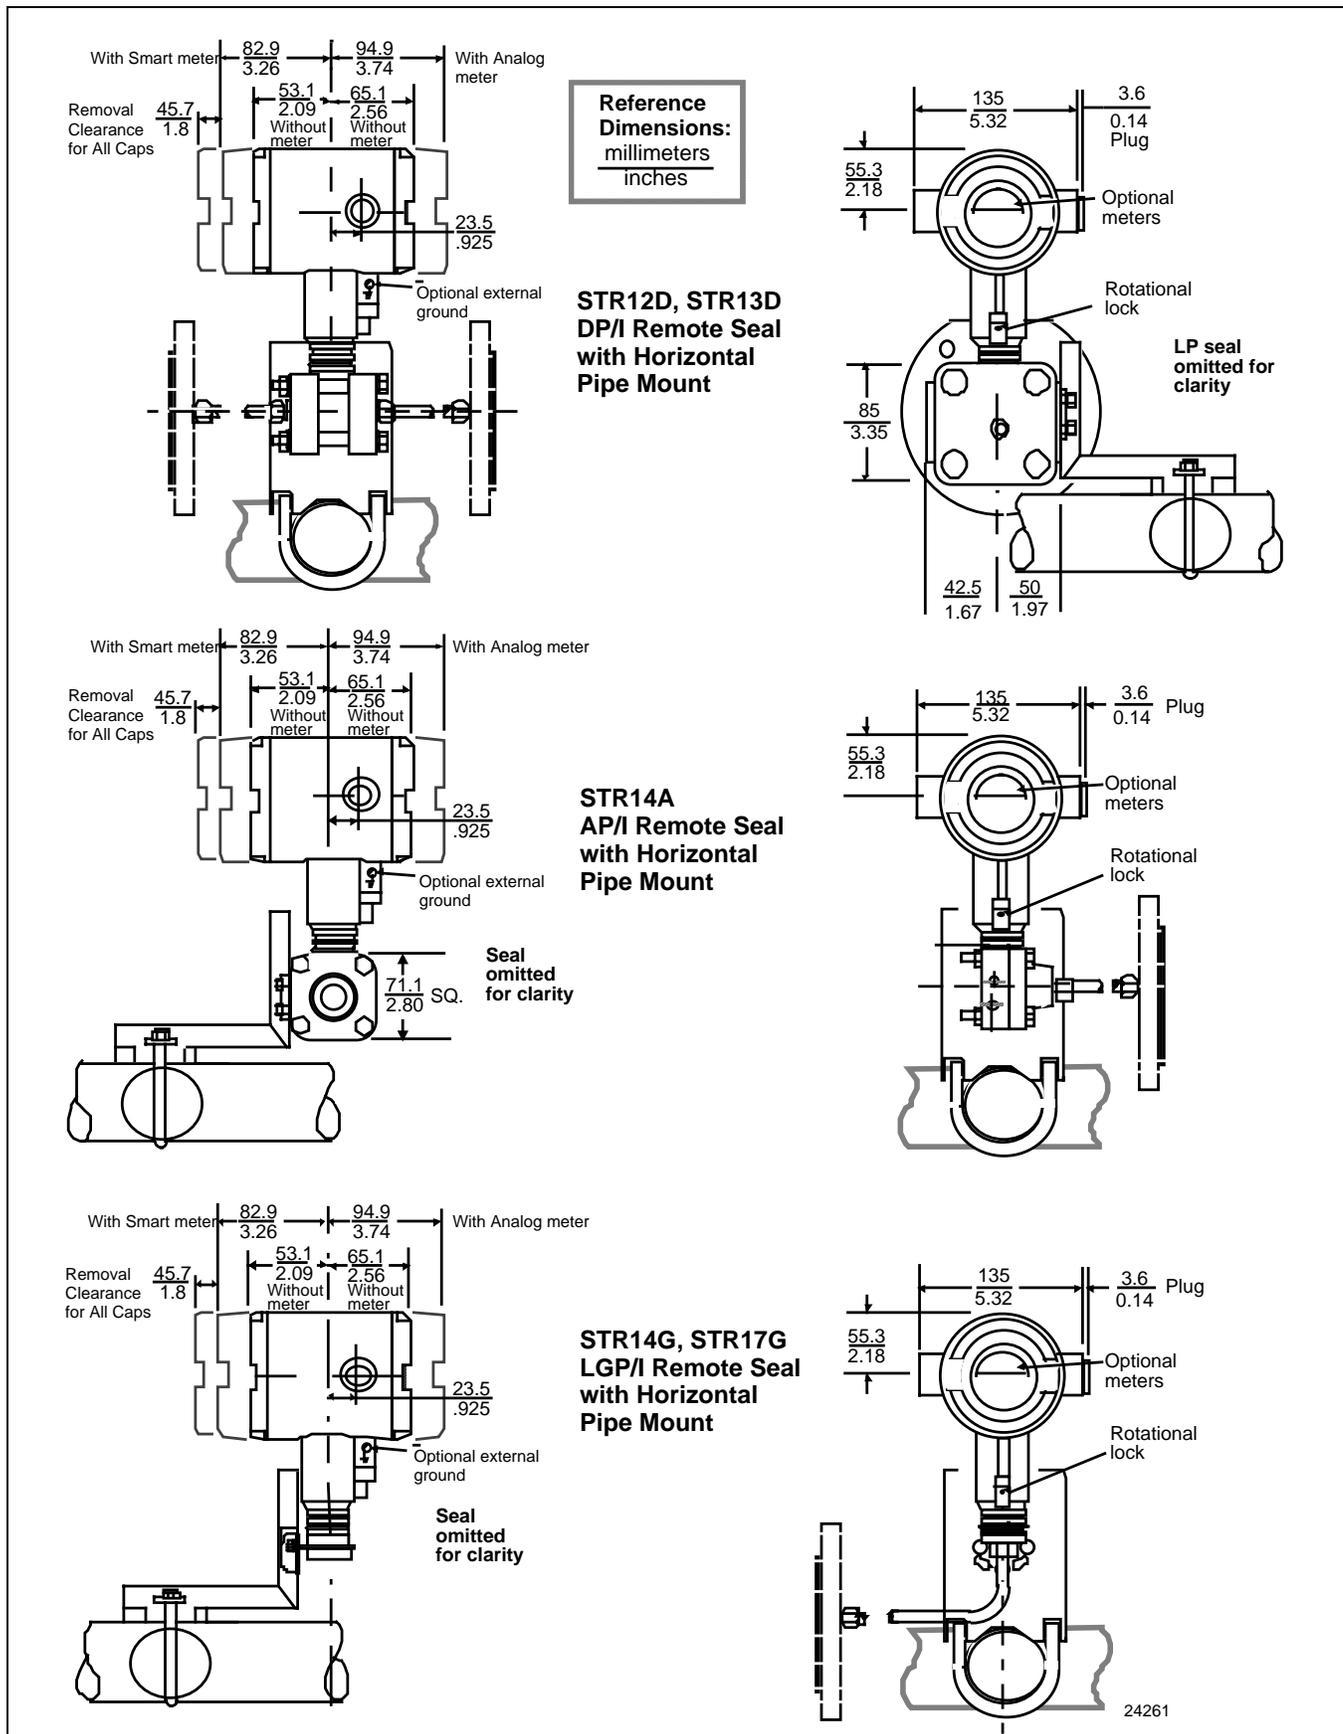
Approximate horizontal mounting dimensions for Remote Seal Transmitter.
